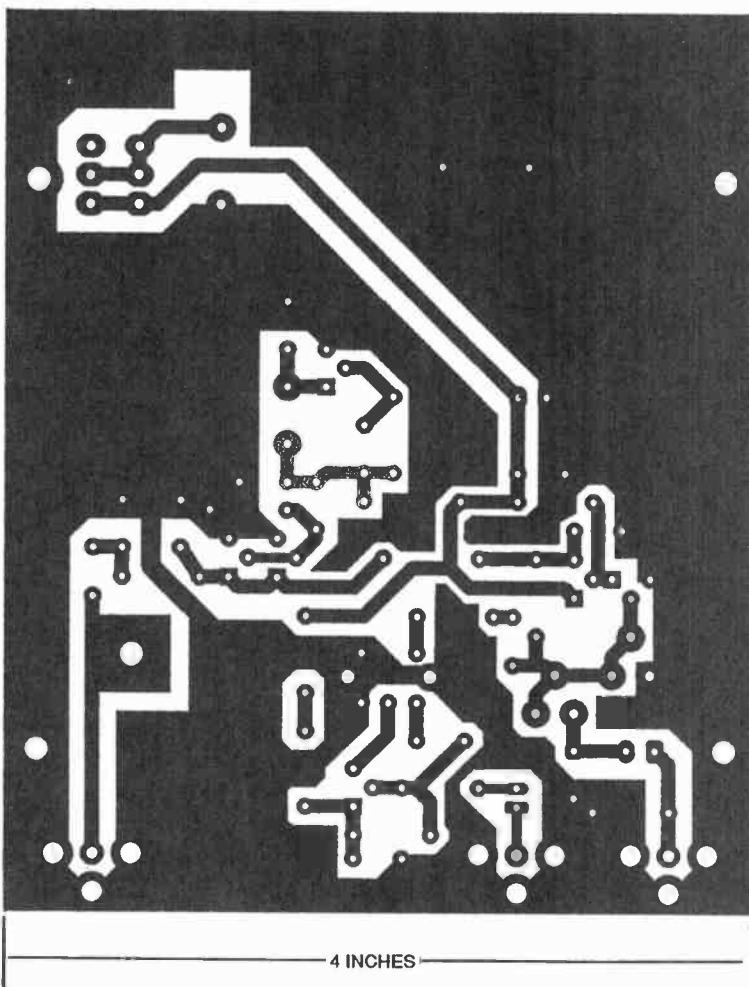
If you wish, you can use this foil pattern to make your own PC board for the TV Transmitter.
